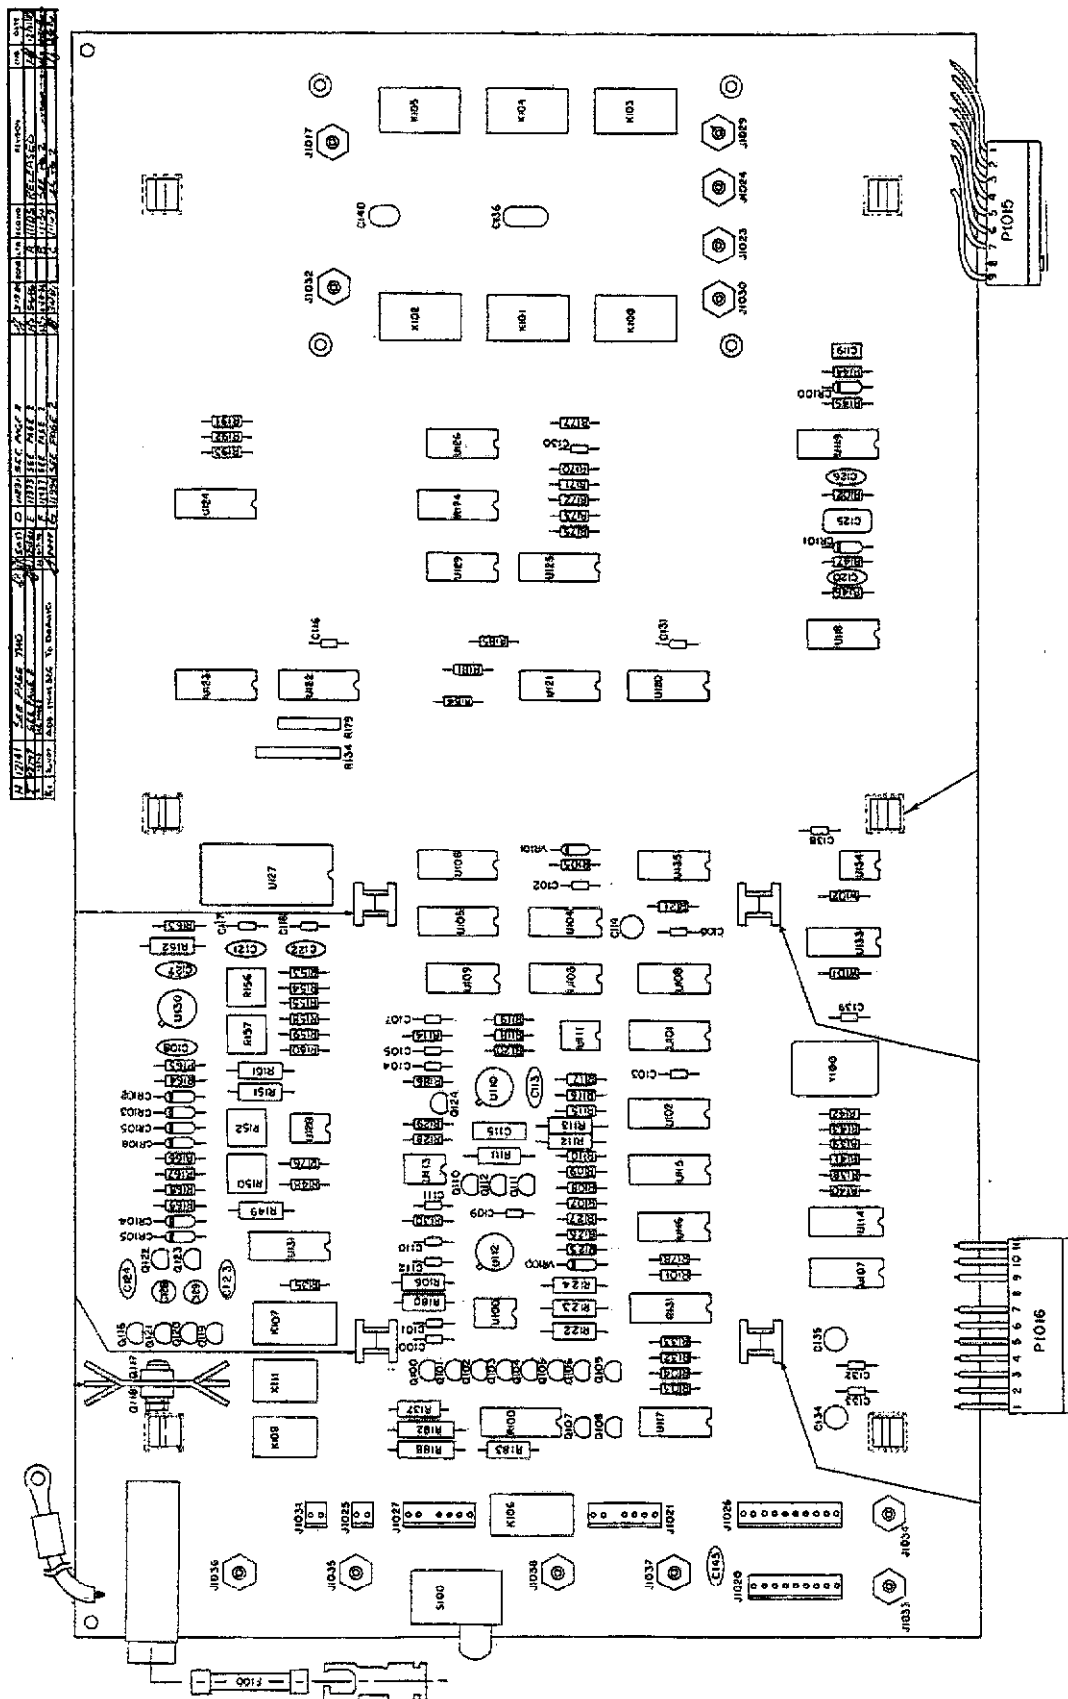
Mother Board, Component Location Drawing, Dwg. No. 590-100
